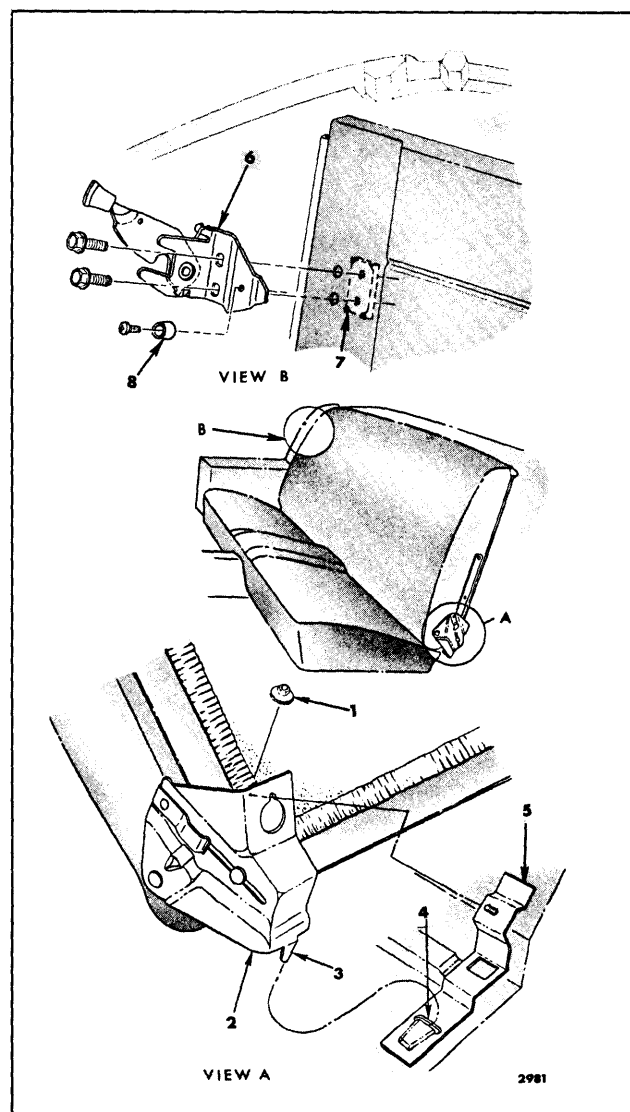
Folding Rear Seat Back Assembly - "F" Body Styles
